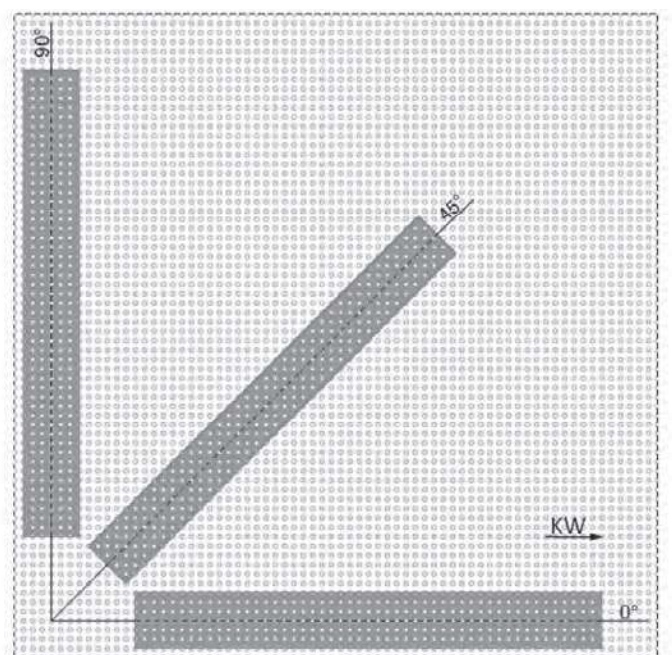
Scheme of perforated metal sheet (Po2s4) with marked directions for cutting specimens
